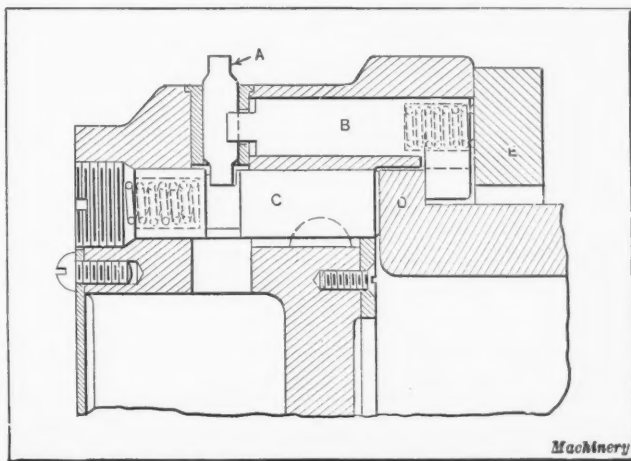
Clamping Means employed in the Rotary Work-holding Fixture used on the Machine shown in Fig. 12
